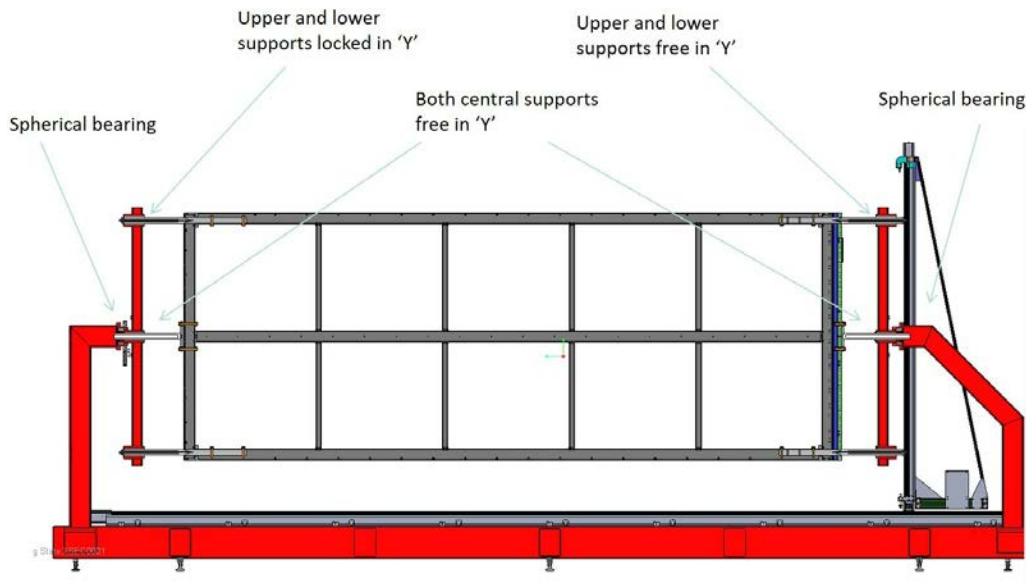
Schematic of the custom-designed APA wiring machine. This shows the updated version with upper and lower supports and the spherical bearings for rotating the APA on the winder.
